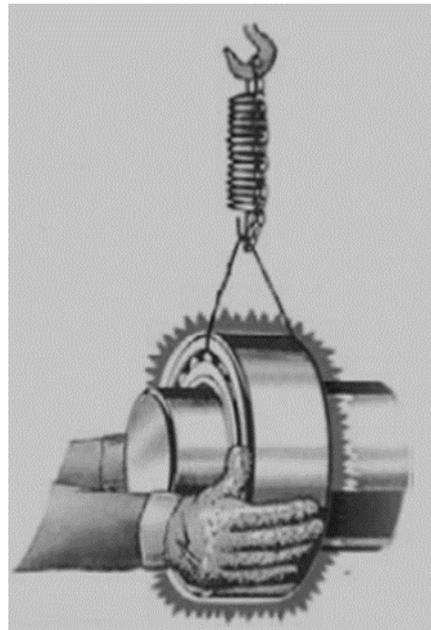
Heating large bearings in an oil bath – lifting gear
